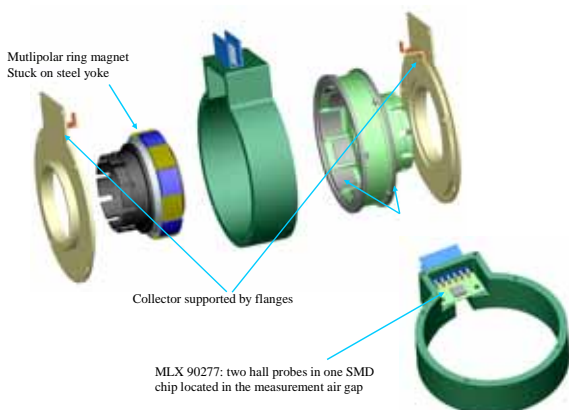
Exploded view of an MMT torque sensor in a cassette design
